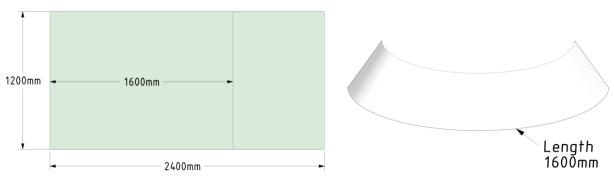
Reflector can be built using the remaining of the steel panel used to build the tank.
